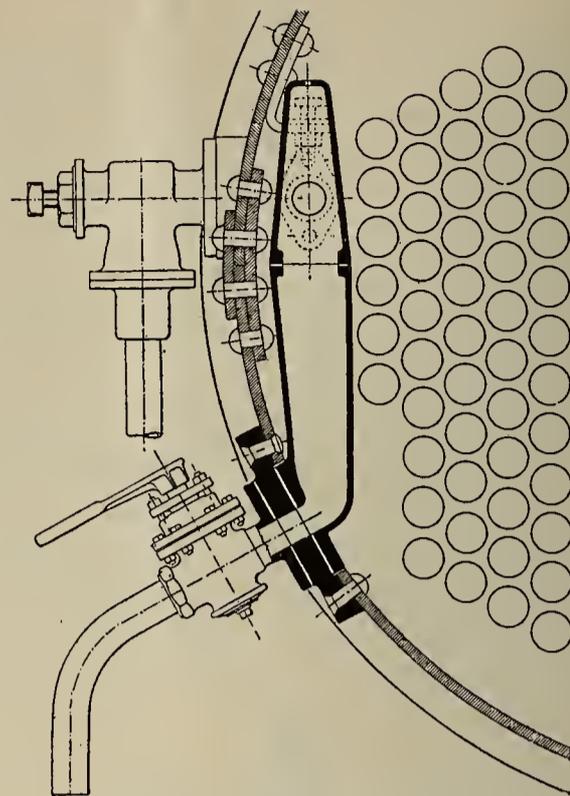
APPARATUS FOR PREVENTING SCALE IN BOILERS.
